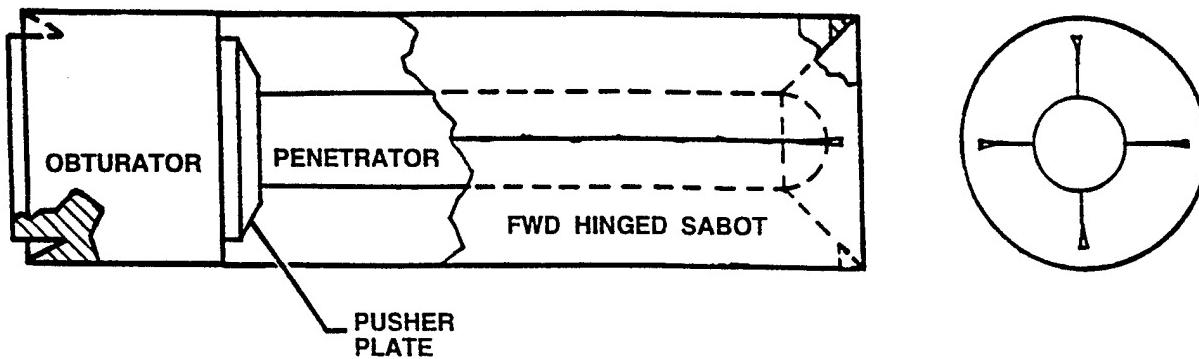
Typical push-launch package. For a 100-mm-long × 20-mm-diameter rod, and with an 8-mm-thick steel pusher plate, this package weighs 900 g.
